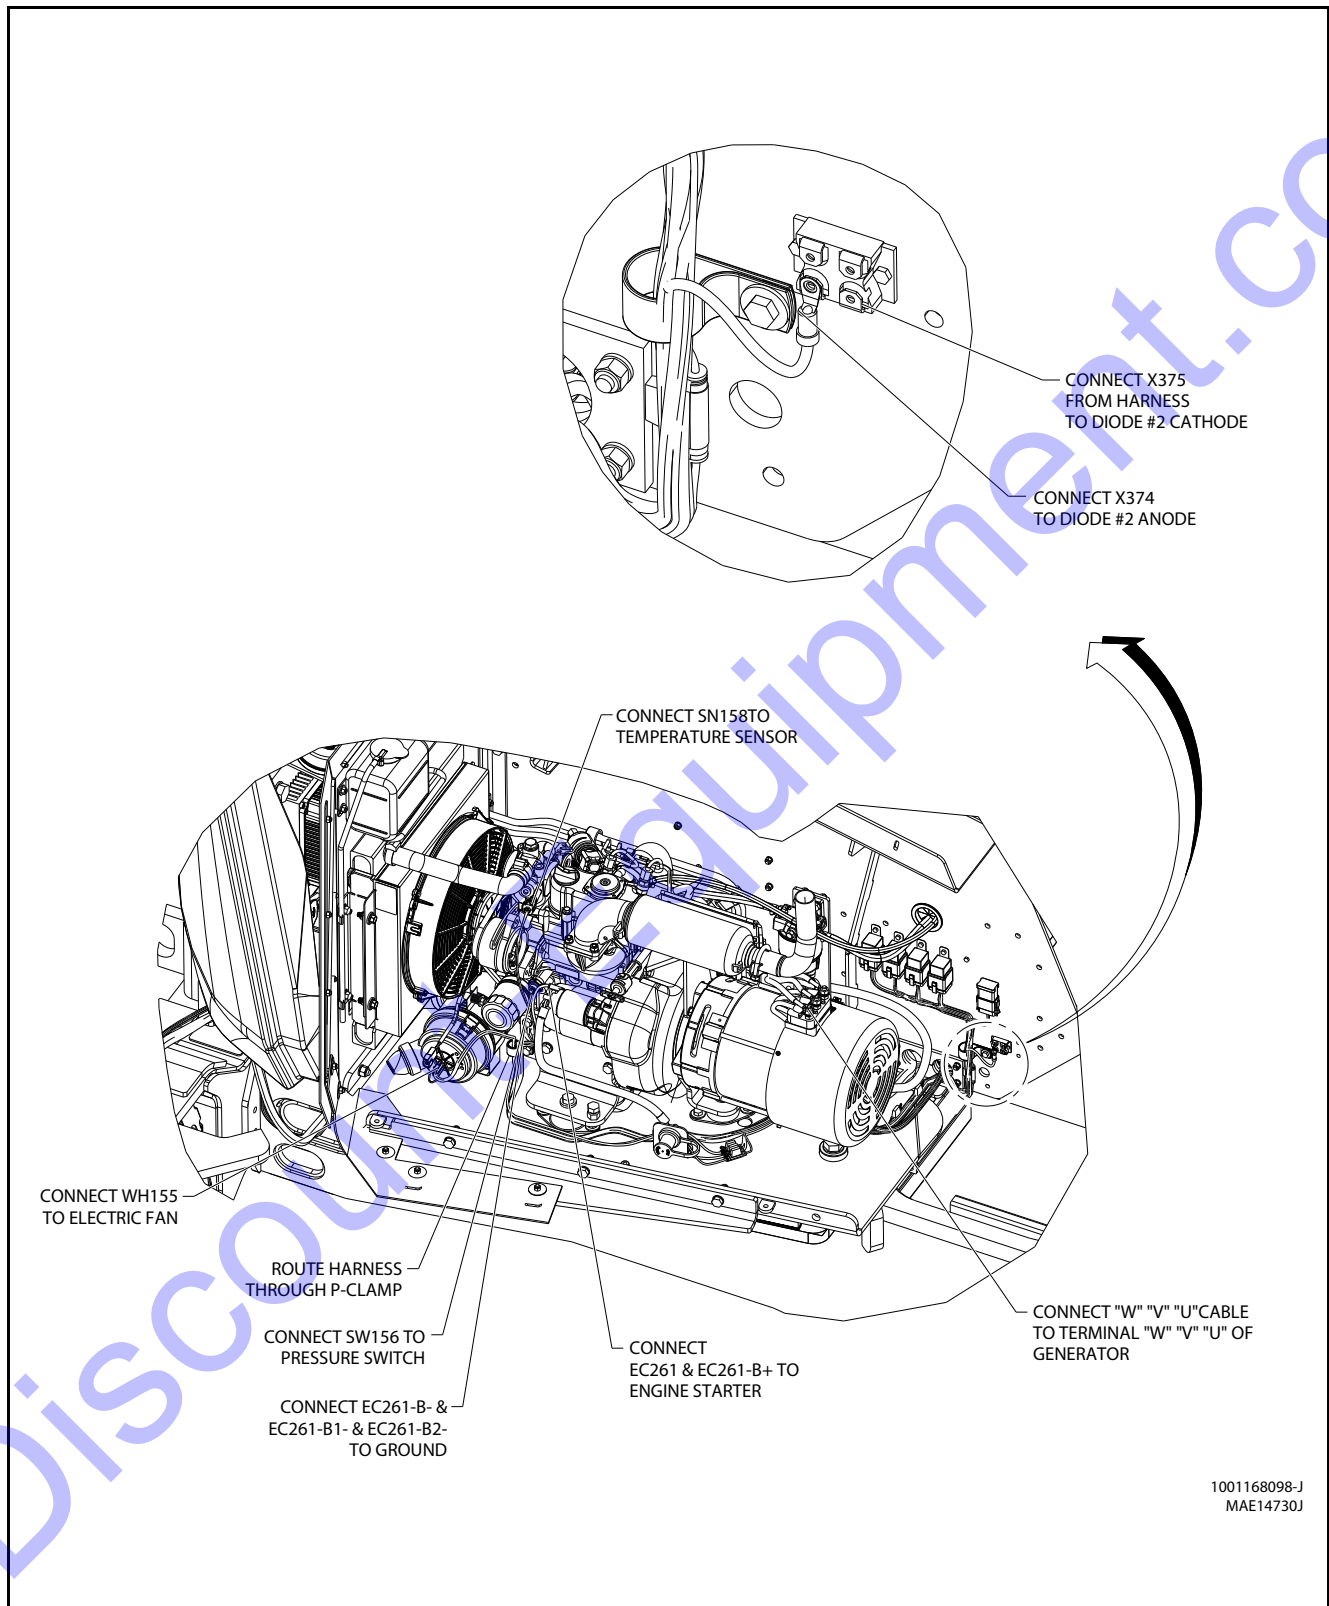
Engine and Generator Electrical Components - Sheet 2 of 4
